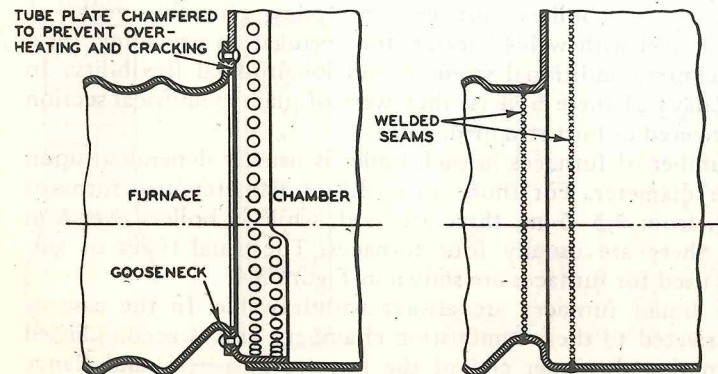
Methods of making furnaces withdrawable (left) riveted; (right) welded
